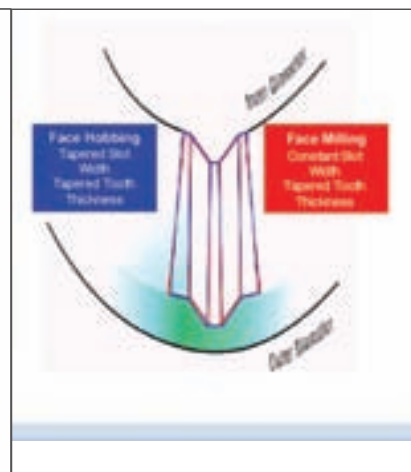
Face milled gears have a constant slot width while face milled gears have a tapered slot width.
